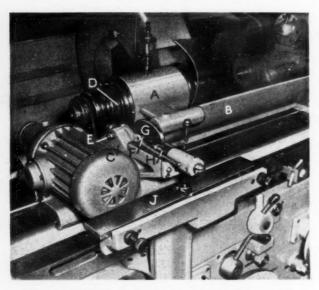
Close-up view of the workhead on the Zocca piston grinder, with cover removed to show the mechanism for producing the required ovality
